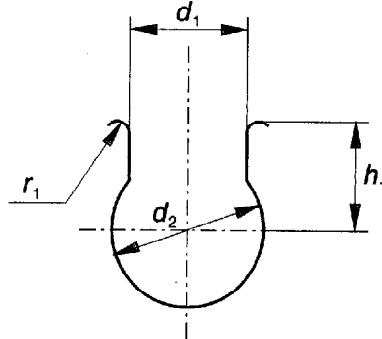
Dimensions of NO GO gauges for ball couplings
